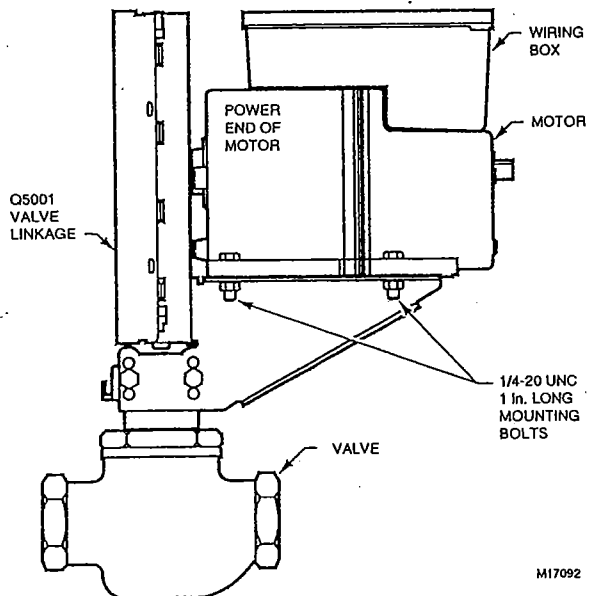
Mounting the motor on a Q5001 Valve Linkage.
